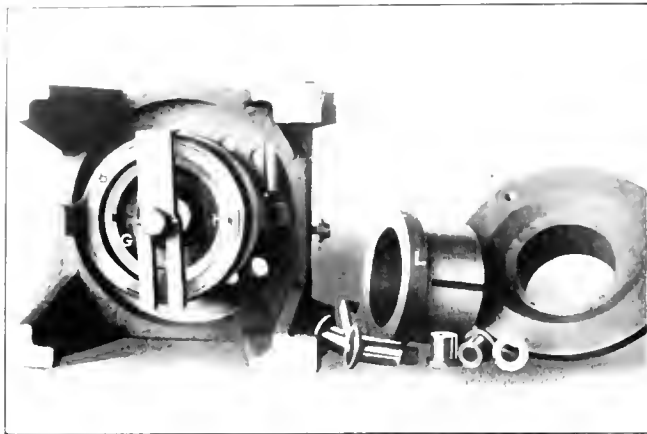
Drill Jig shown in Fig. 78 used for Drilling Friction Sleeve
